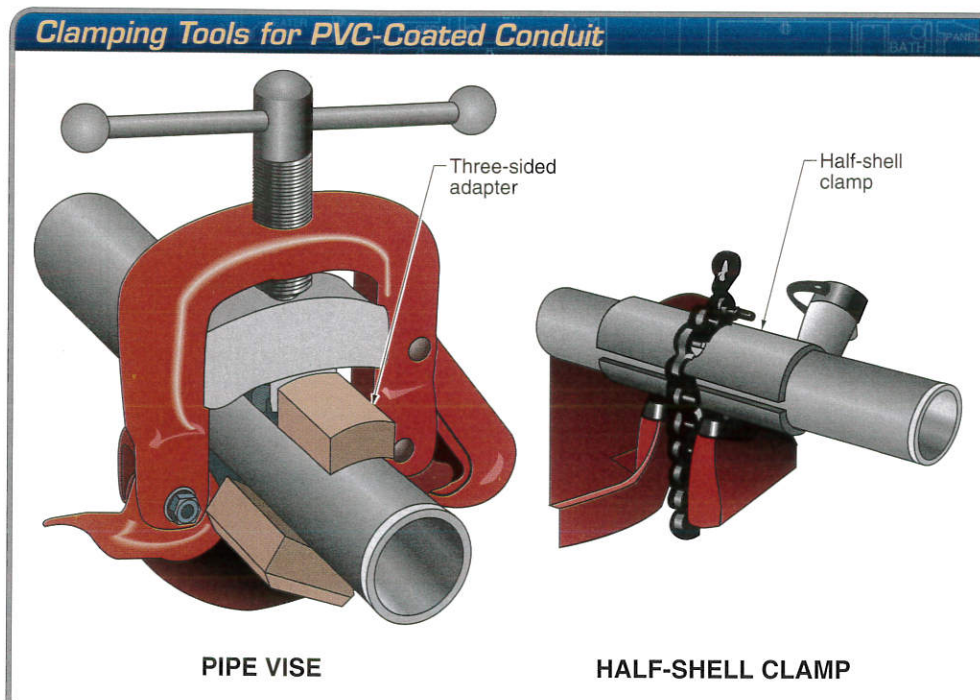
PVC-coated conduit requires special clamping tools to prevent damage to the coating.
